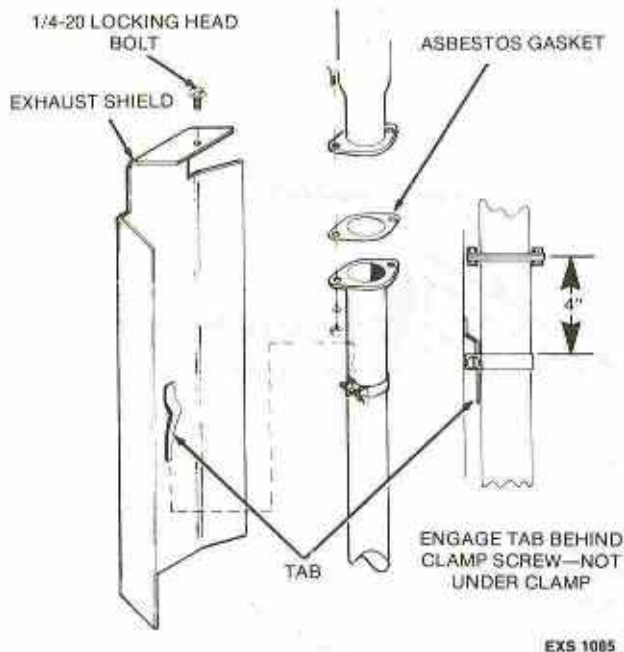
EXHAUST SHIELD TAB ENGAGEMENT
